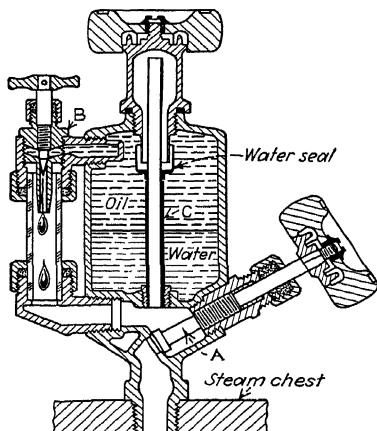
Drop-feed oiler for small steam-engine and pump cylinders.
